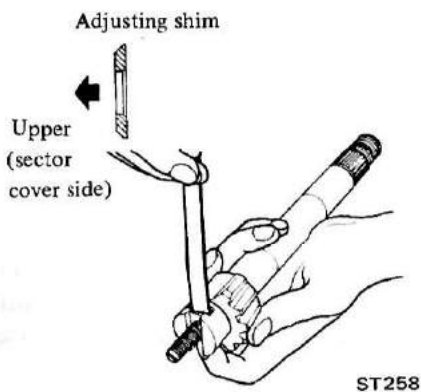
Measuring end play between sector shaft and adjusting screw
